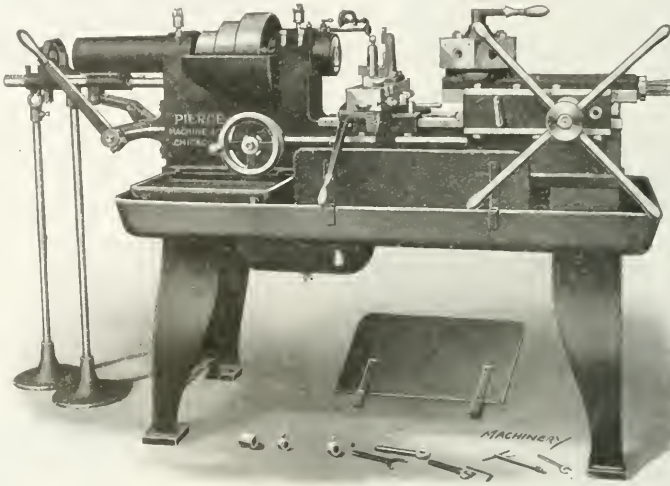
Pierce 1- by 8-inch Heavy-pattern Turret Screw Machine with Plain Head
